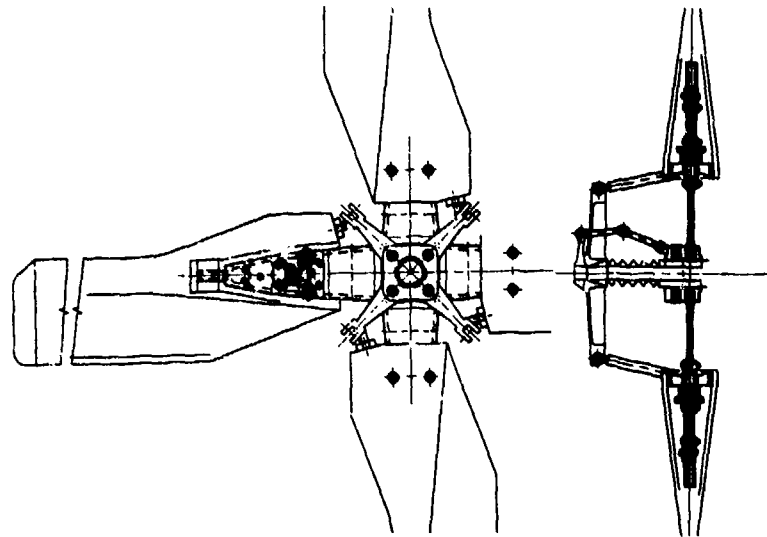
EH101 TAIL ROTOR LAY OUT
